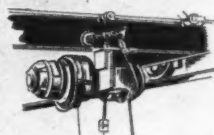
A centrifugally-operated mechanism is employed to strip a mold from a casting
